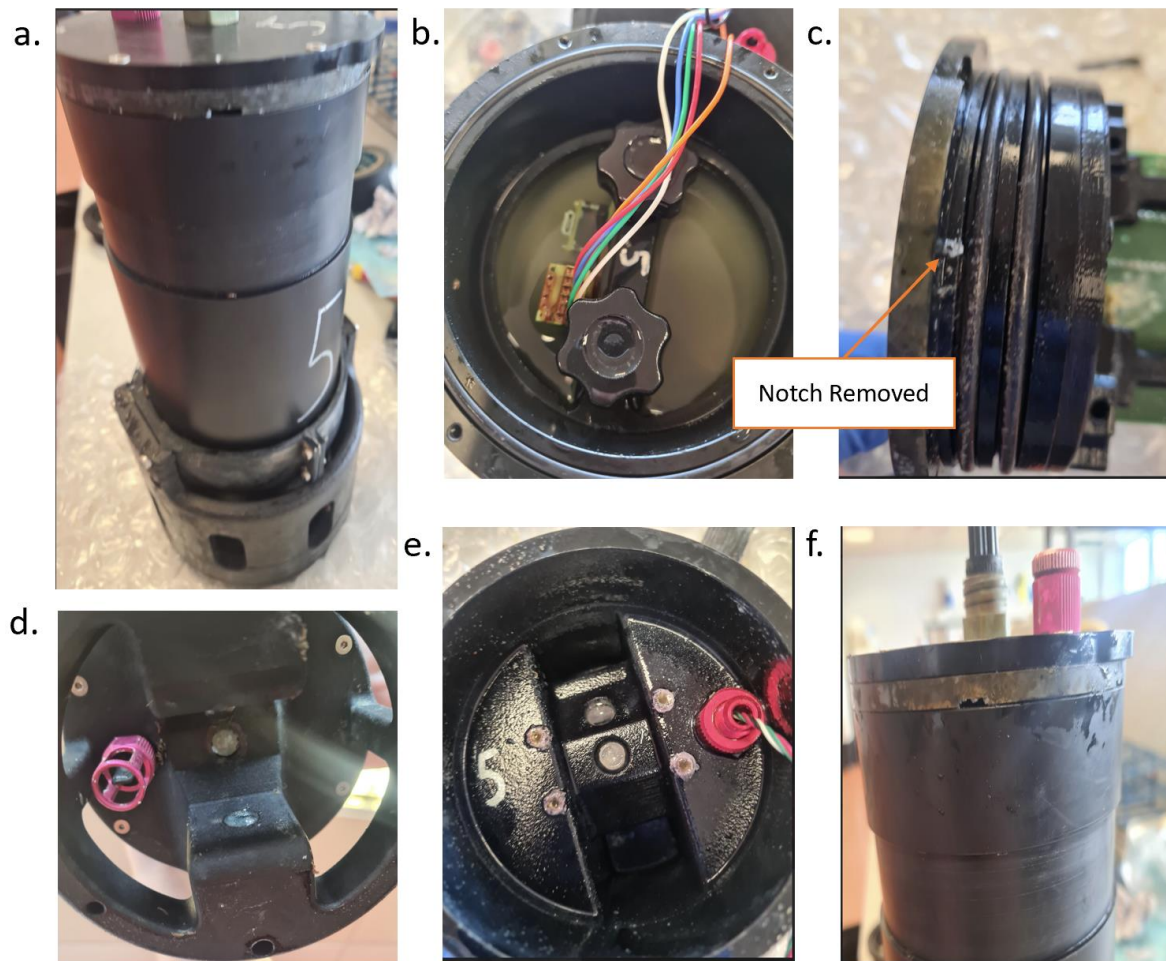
Visual inspection images of AWaMS5 which failed while deployed in Clontarf. (a) View of sensor body with no obvious signs of damage. (b) View inside sensor enclosure showing large volume of sea water. (c) View of the top flange and O-Rings with a small silver notch visible in the flange indicating possible damage. (d) Bottom view of the optical head showing no signs of damage. (e) Internal top view inside the optical head showing moisture with white deposits around the brass thread inserts. (e) Inspection image of the top flange showing discolouration of the external surface of the black anodised coating.
